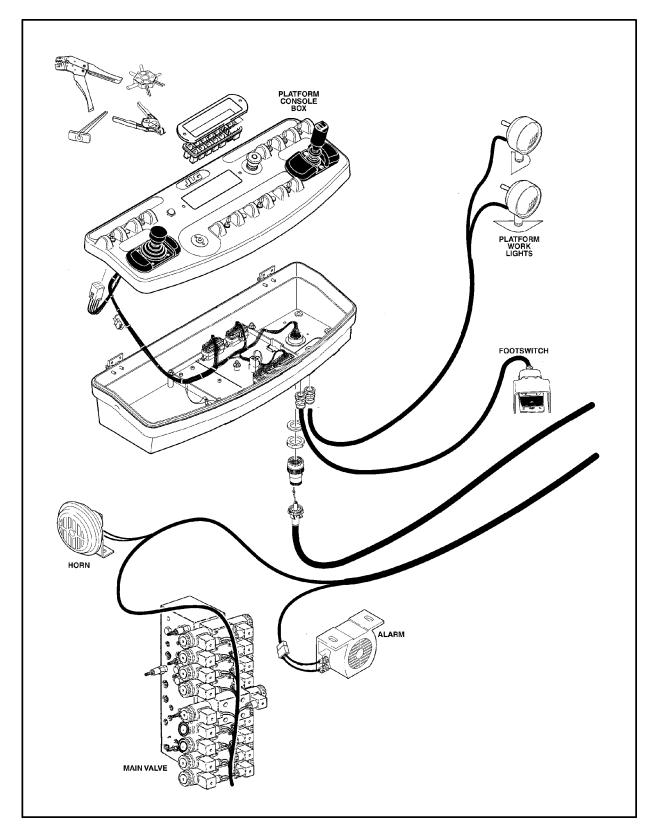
Electrical Components Installation (S/N 62137 to Present)-Sheet 1 of 2
